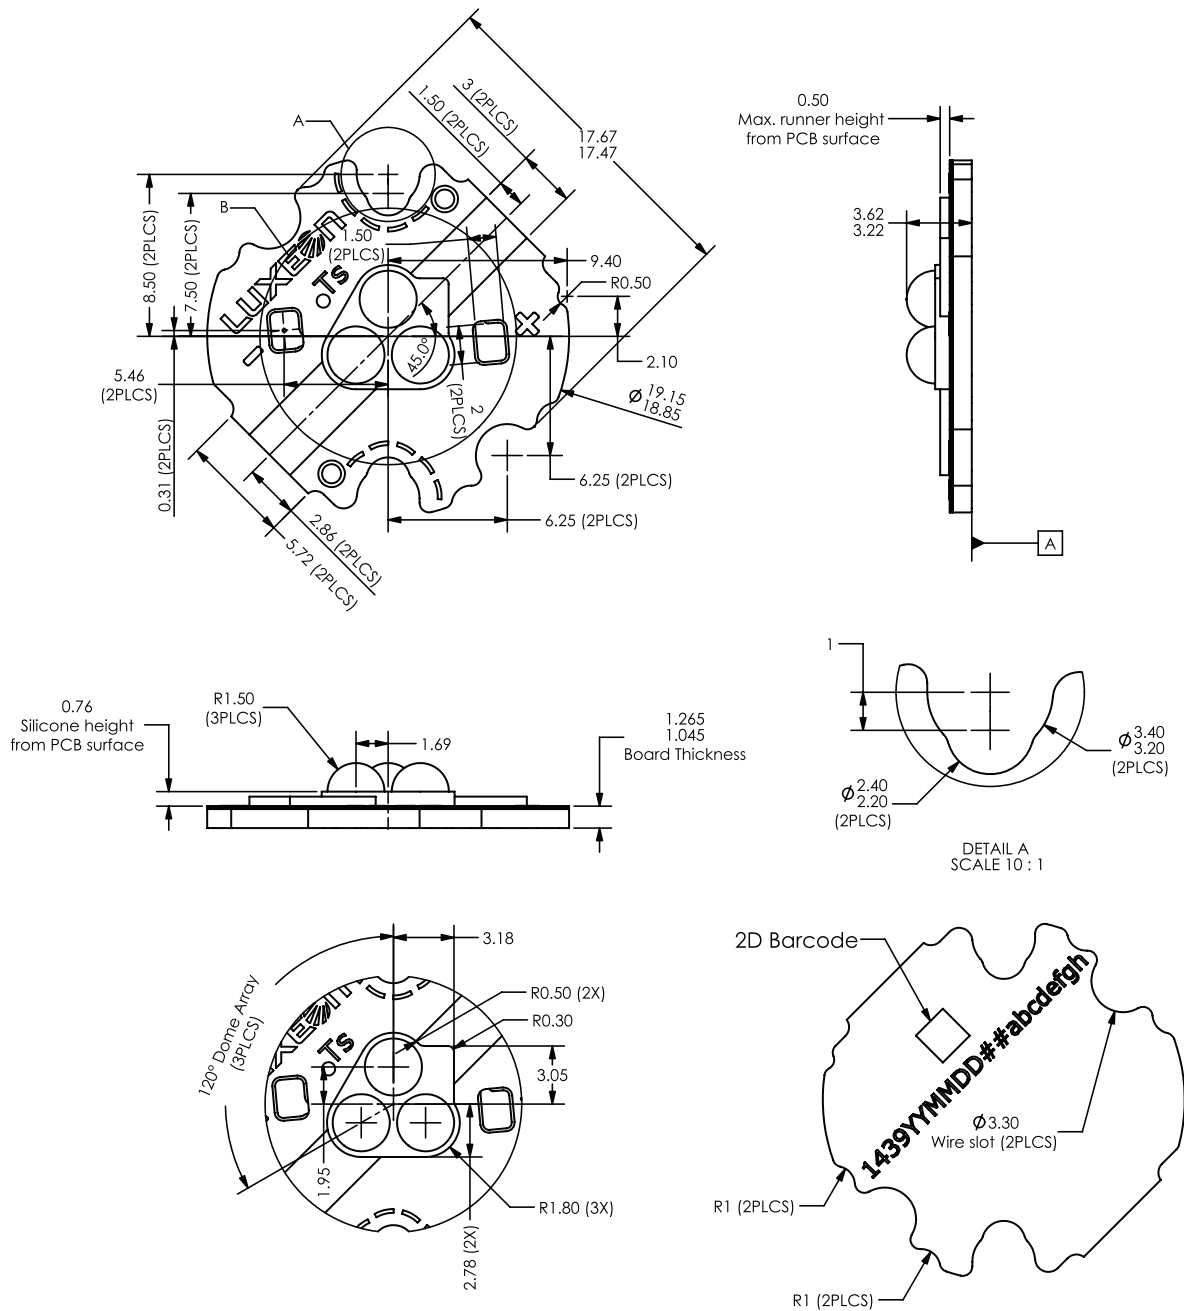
Dimensions for LXKx-Pxxx-xxx3.
